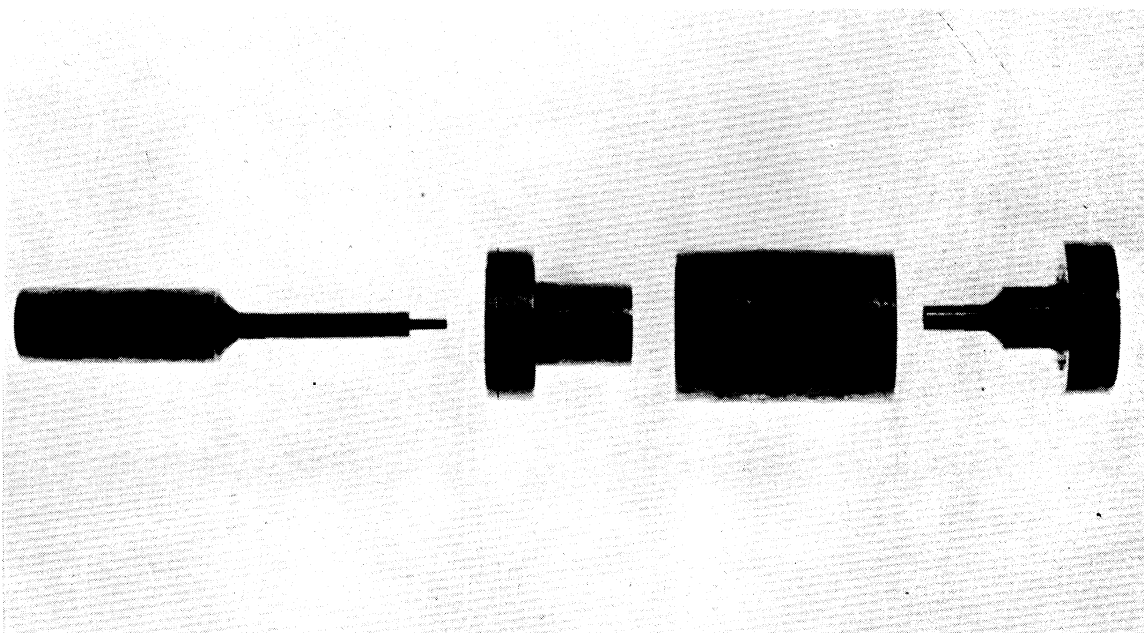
Combination Punch and Die Used for Making the Washers for the Specimen Assembly.
